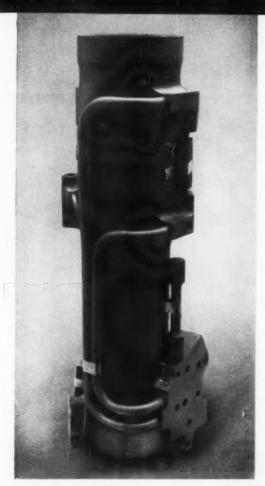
Typical Hydraulic Actuator Cylinder SLowing H-11 Steel Barel Brazed to Type 321 Stainless Steel Lines. Process control coupons are included for tensile and decarburization tests
